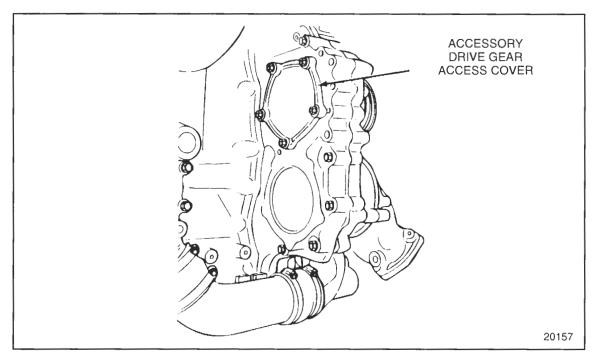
Accessory Drive Assembly Drive Gear Access Cover
